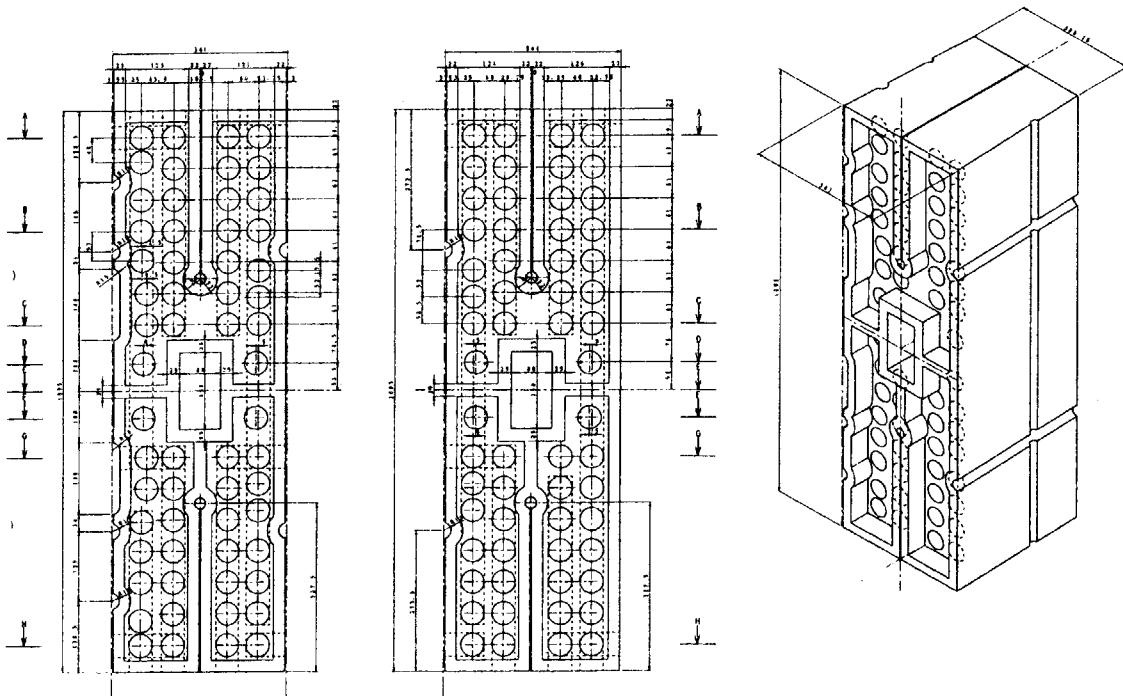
design sketch of 1/4 radial channel shield block (2)
